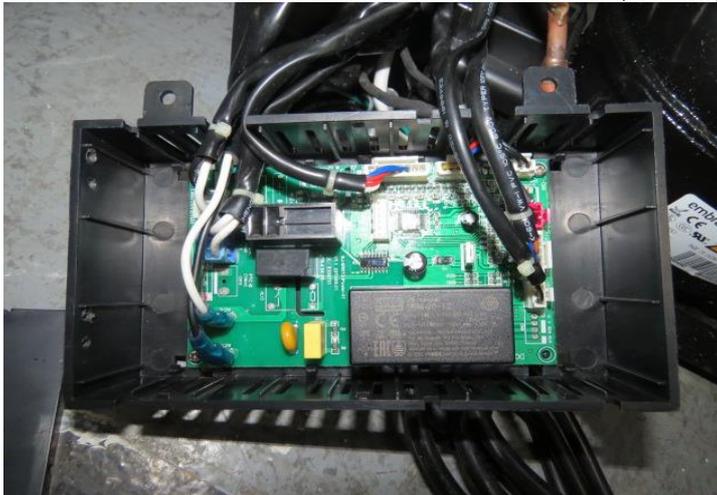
Front view of control board assembly BJ-MW112-Power-01
